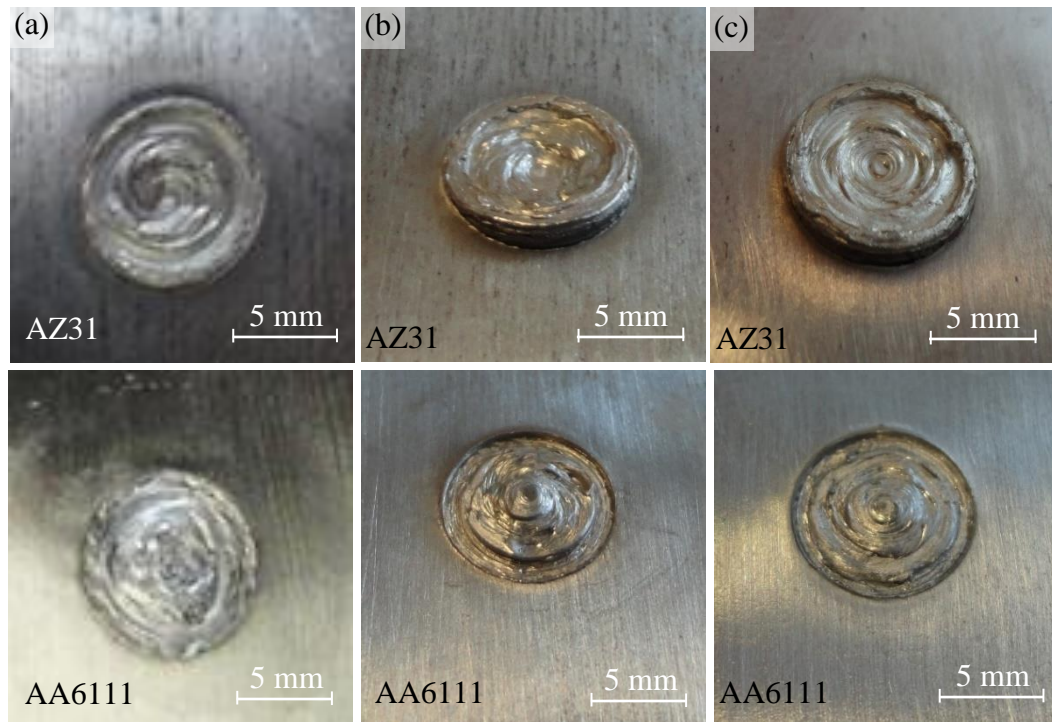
Examples of typical joint failure behaviours, showing both halves of the fractured lap shear test samples produced using a 1.0 mm sleeve plunge depth and 1.0 s welding time: (a) for the conventional RFSSW process with a 2500 rpm tool rotation rate; (b) the modified RFSSW with a 2500 rpm tool rotation rate; and (c) the modified RFSSW process with a 2800 rpm tool rotation rate.
